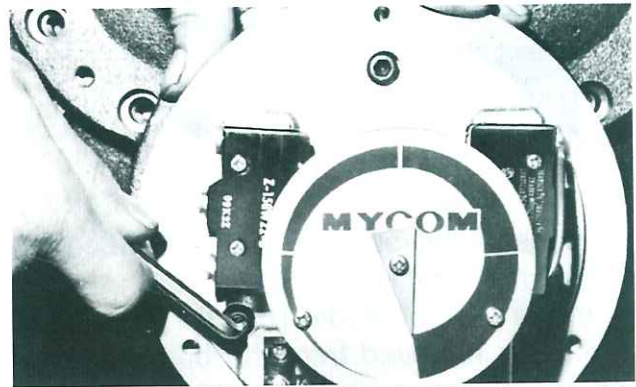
Loosening Micro-switch Mounting Plate Clamping Bolt
